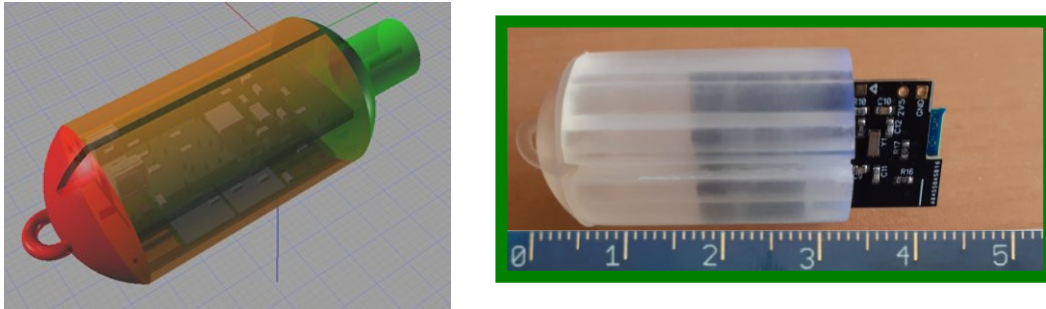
The design of the PCB board inside its case (left) of the first prototype of FloSen; The picture of the PCB board of the first prototype of FloSen inside the transparent case
